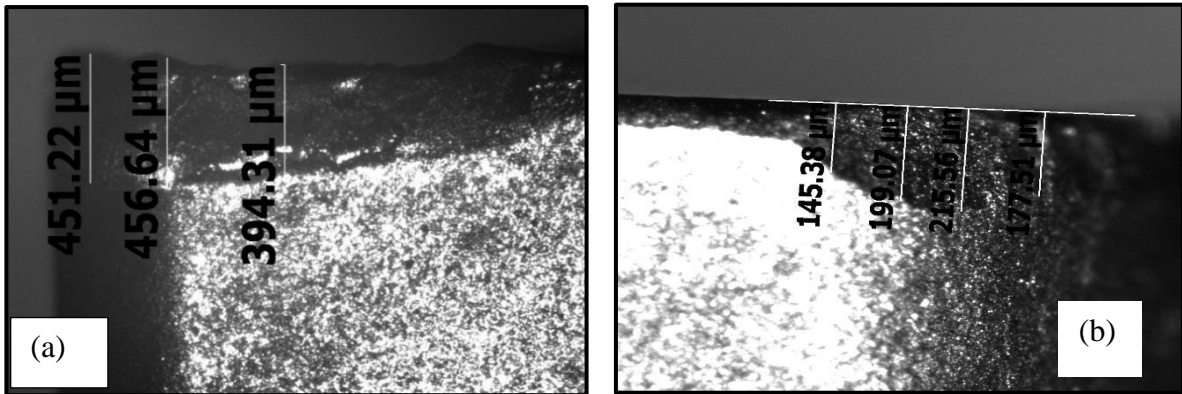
Tool wear observed after machining 9 min, at (a) 30°C (b) 600°C
